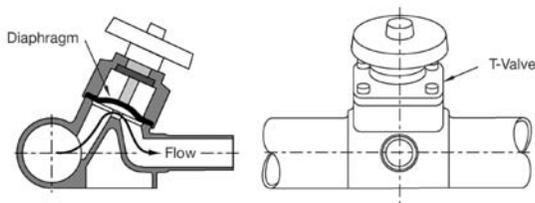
K Molded T-Valve with significantly reduced dead-leg
